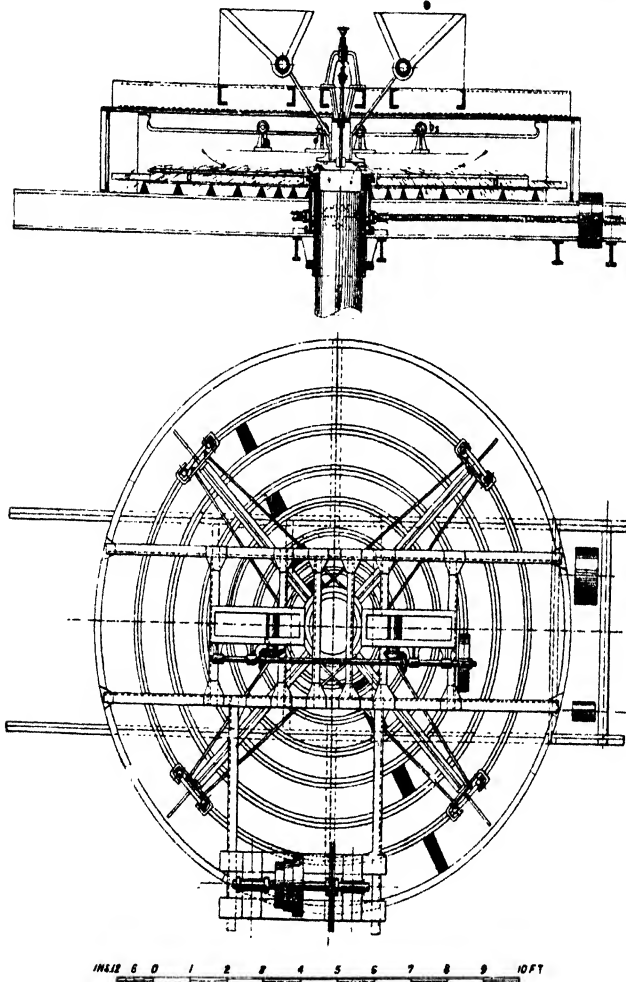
Pape-Henneberg separator. Plan and vertical section.
